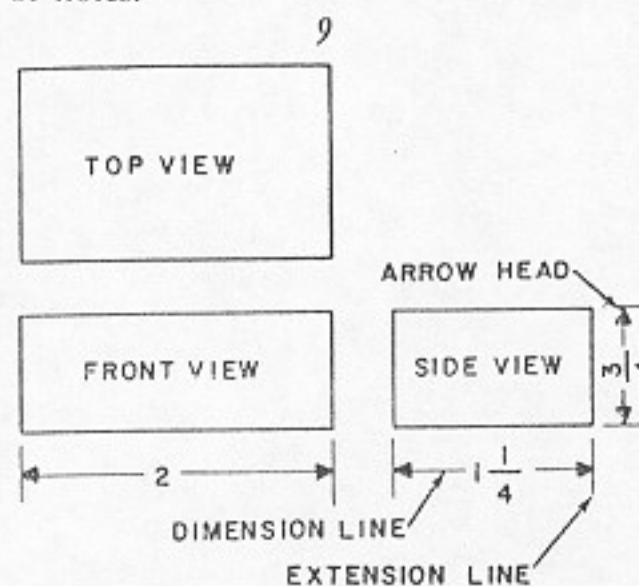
Dimension lines indicate on a drawing the exact measurements on the object.
